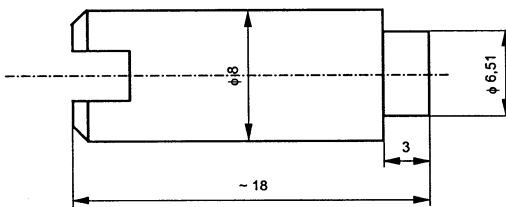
Shape and dimensions of the sample (3 pieces for measurement).
